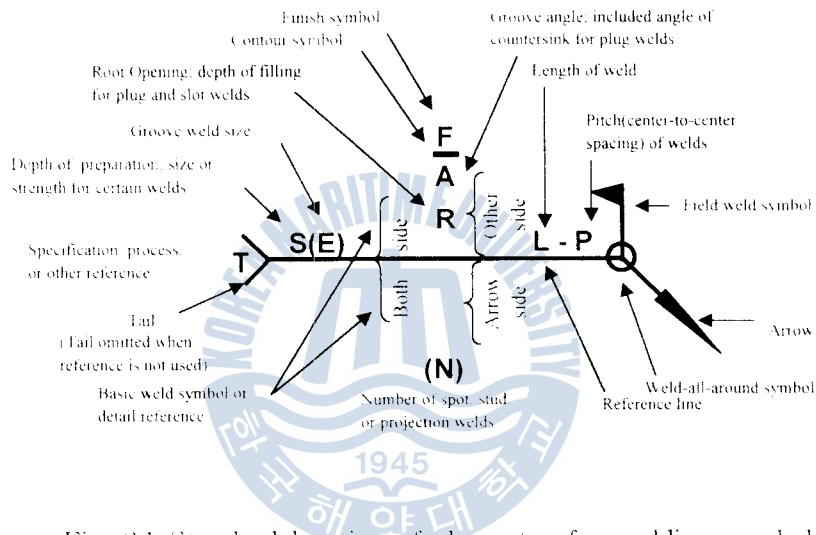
Standard location of elements of a welding symbol
